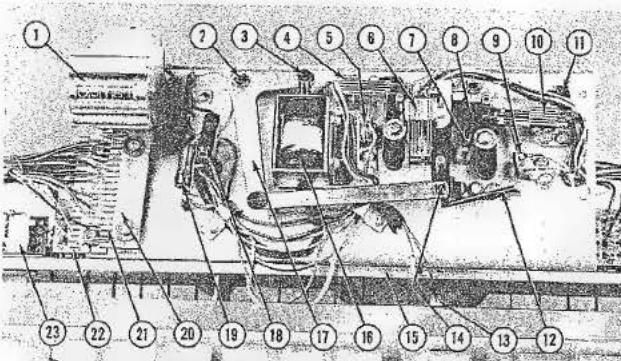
SELECTOR SWITCH ASSEMBLY, 2400S
